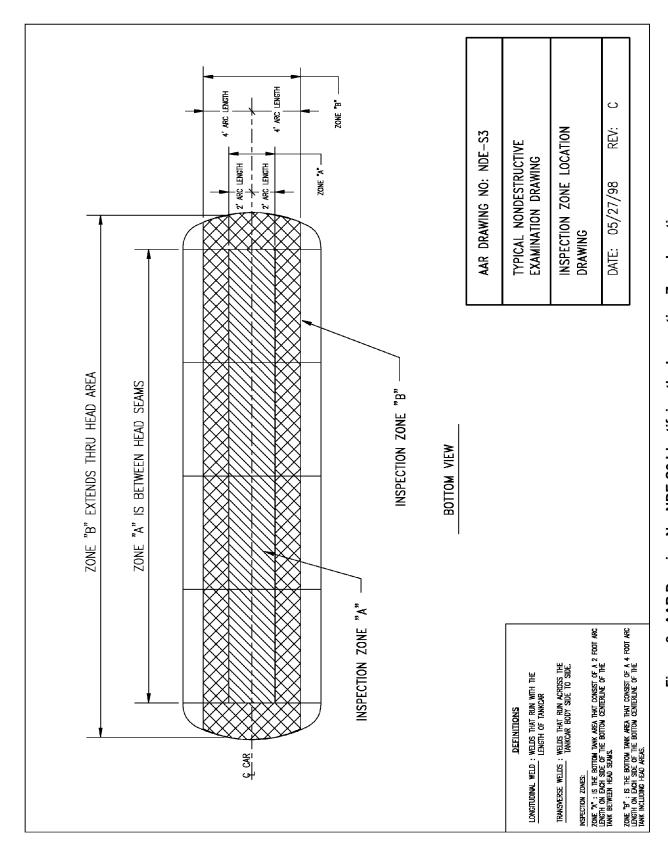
AAR Drawing No. NDE-S3 Identifying the Inspection Zone Locations
